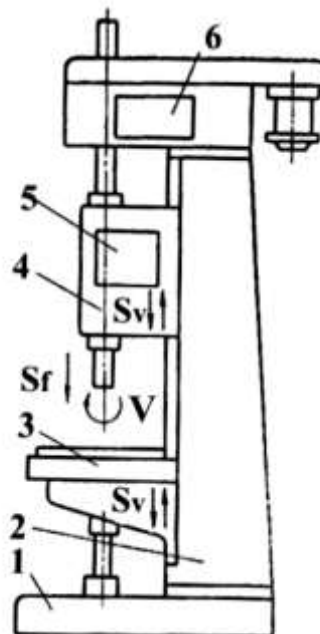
Upright drilling machine: 1 bed; 2 – column; 3 – table; 4 – spindle; 5 – feed gear box; 6 – speed gear box; V – spindle (tool) revolution;  $S_f$  – feed motion;  $S_v$  – vertical motion of table 3 and feed gear box 5
